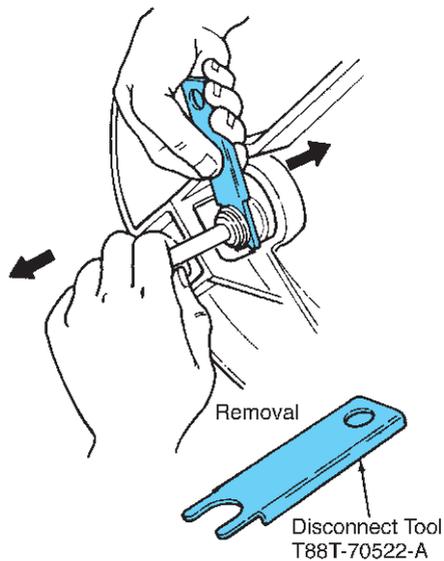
Most older cars used threaded line connections to the clutch master and slave cylinders. This vehicle uses a snap-in connector that requires a special tool for disassembly. (Courtesy of Ford Motor Company)
